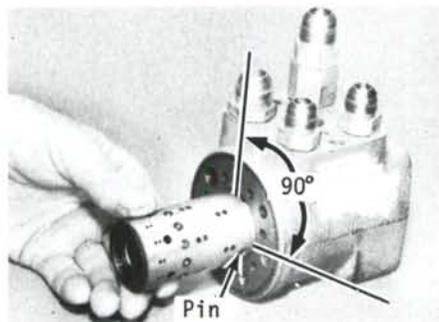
Install sleeve into body with drive pin at right angle (90°) to fitting side of body.
